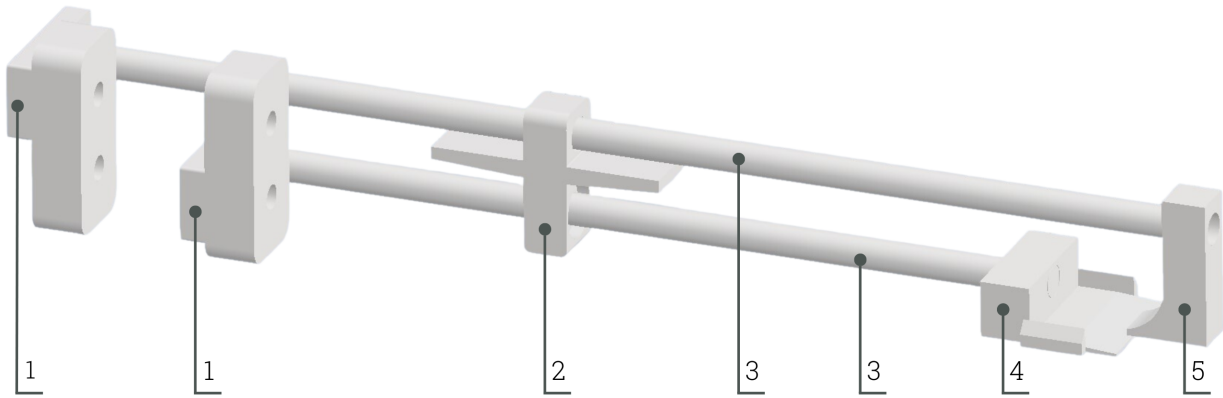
Schematic of the designed tool. (1) parts connecting the tool to the gripper fingers, (2) an intermediate part that allows the lower part of the tool to be fixed and the upper part to slide at a defined distance, (3) bars for the support of the whole tool, (4) receiving part that also applies the force in the component to desolder it, (5) and the end part that applies the force to ensure the grasping is performed.
